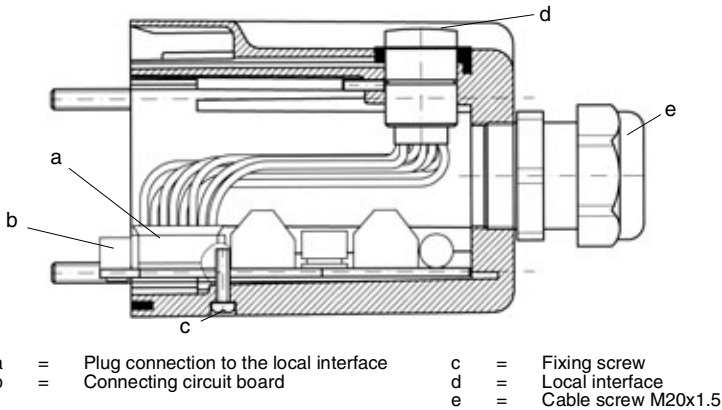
Receiver cap /T1 removed, view from the side
